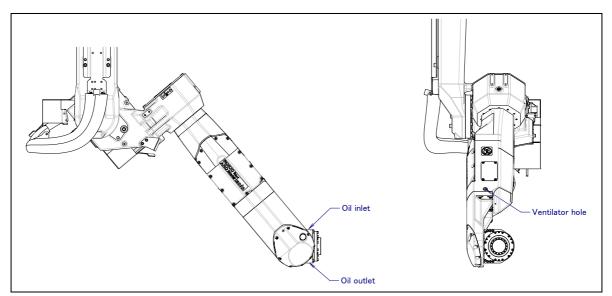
(c) Oil inlet/outlet and ventilator hole (except A05B-1225-B271, B272, B281, B282)
